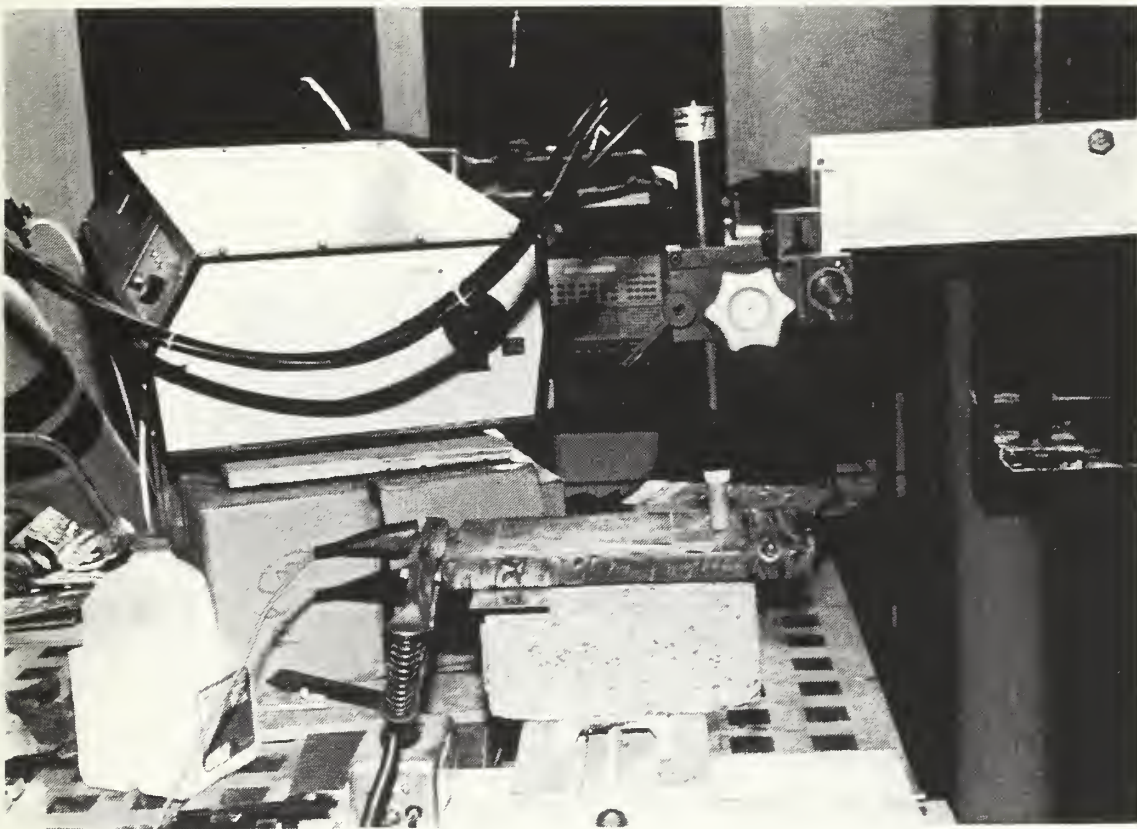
GTAW Torch Setup for Automatic Welding.
